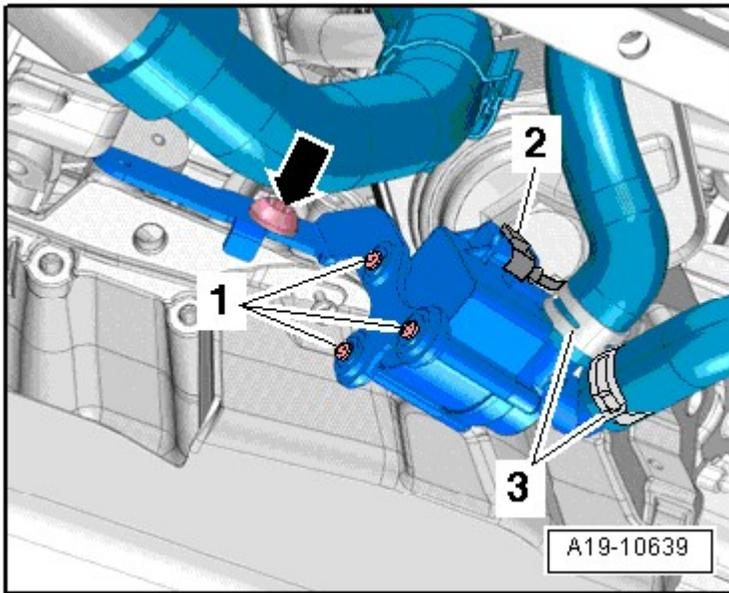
Identifying Engine Coolant Circulation Pump Bolt
